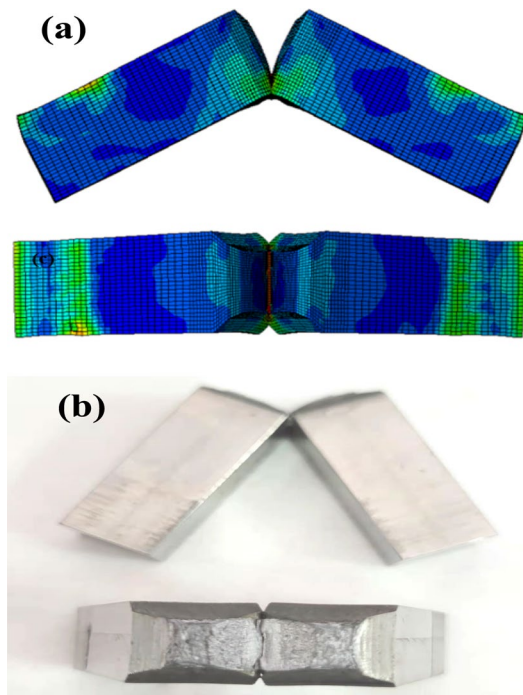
Fractured surface morphology: (a) Fractographic features in simulation, (b) Fractographic features in test
